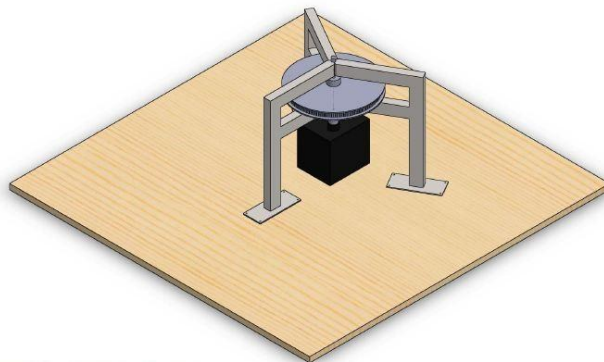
Mounting Design: Single Plywood Plate with Pulley Support
